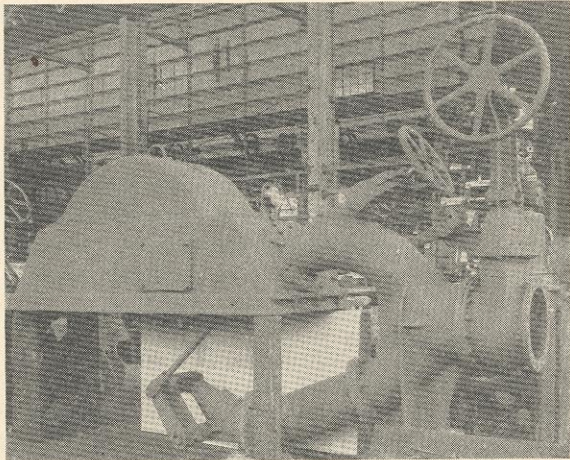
HOUSING AND NOZZLE ARRANGEMENT FOR A DOUBLE NOZZLE WHEEL
